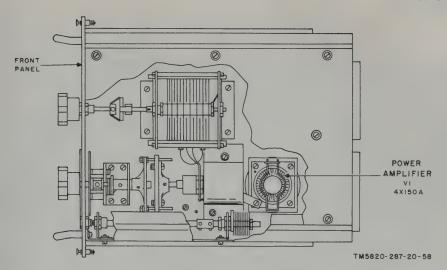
AM-1180/GRC (A-band), tube locations, bottom view.
